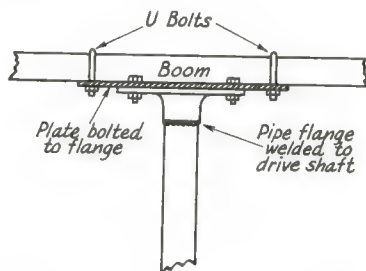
A method of boom mounting that minimizes wind loading and eliminates slippage between boom and mast.
